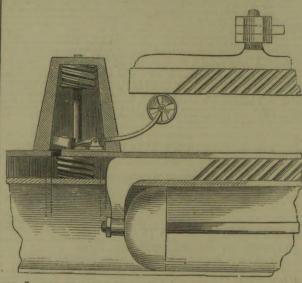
KEY OR VALVE FOR ADMITTING THE AIR INTO THE TUBE.
